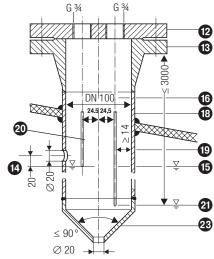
Protection tube (provided on site) for installation inside the boiler and in combination with other GESTRA equipment
